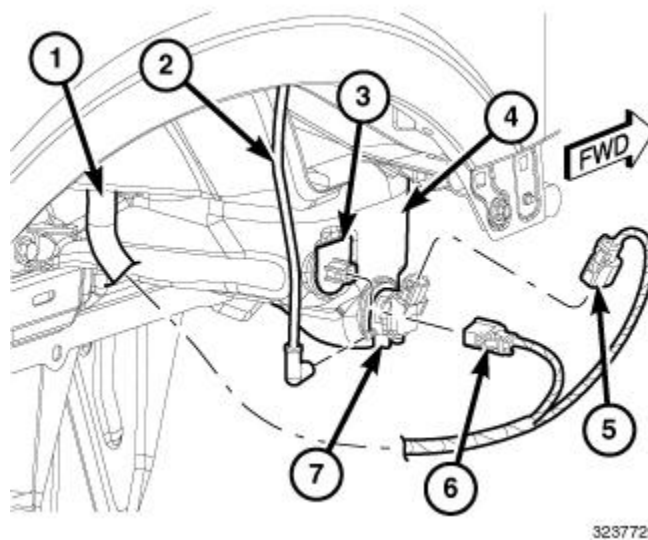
Washer Pump/Motor Unit, Washer Reservoir, Dash Wire Harness, Pump Motor & Washer Hose
